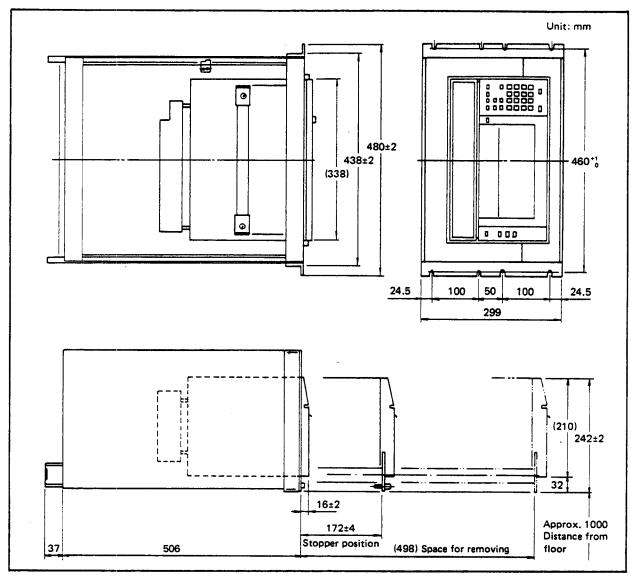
External Dimensions of Rack Mounted Instrument (Special Order).
